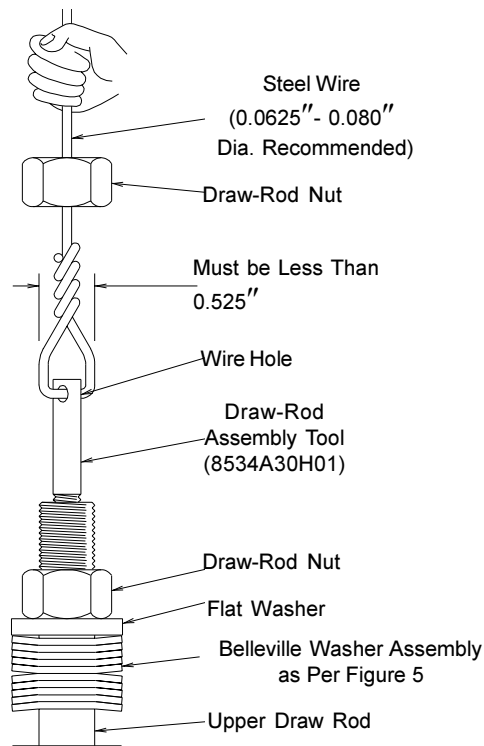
Assembly of Draw-Rod Nut Over the Draw Rod
